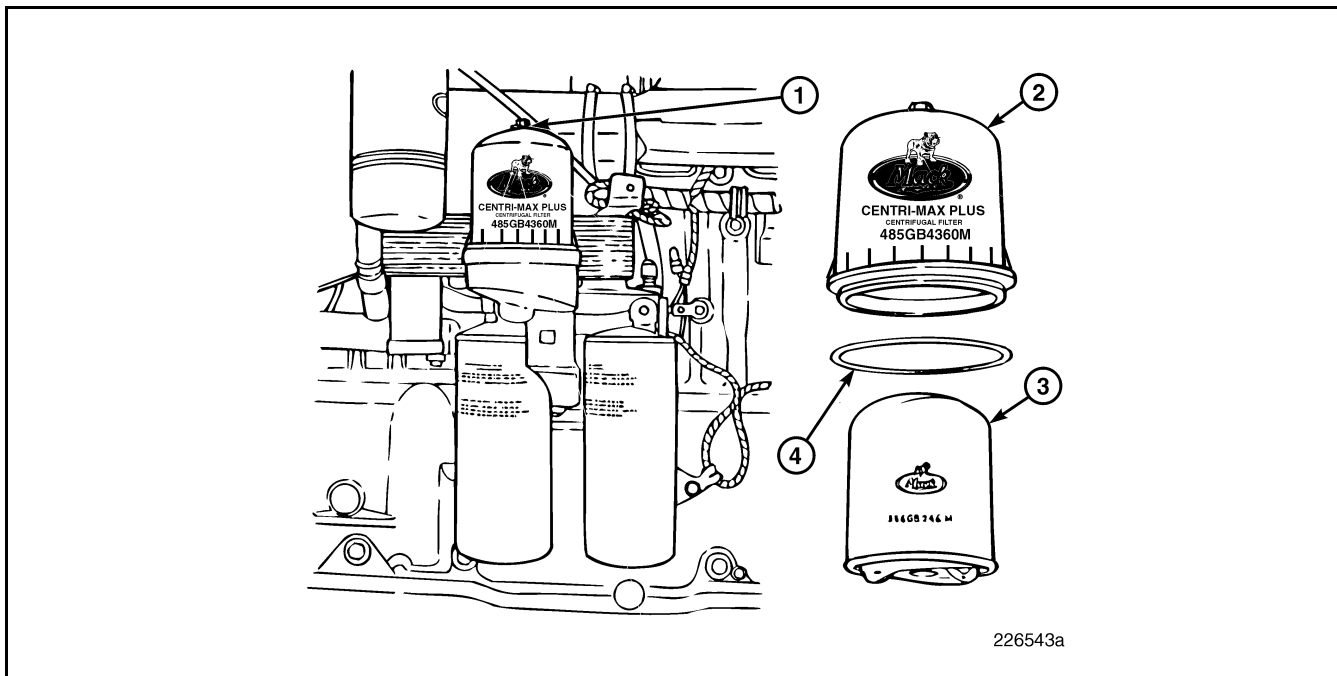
Centri-Max® PLUS Oil Filter Assembly
